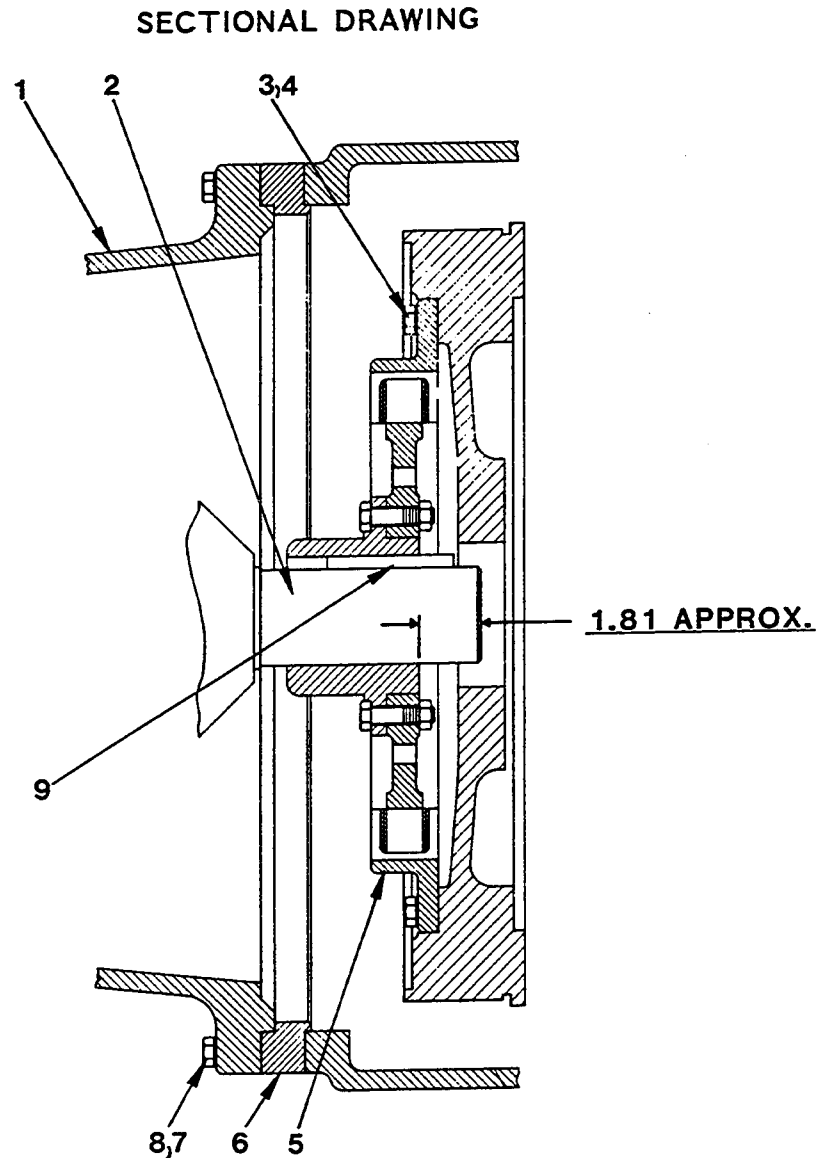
Standard Drive Assembly For Pump Model VG4D3-BF6L
